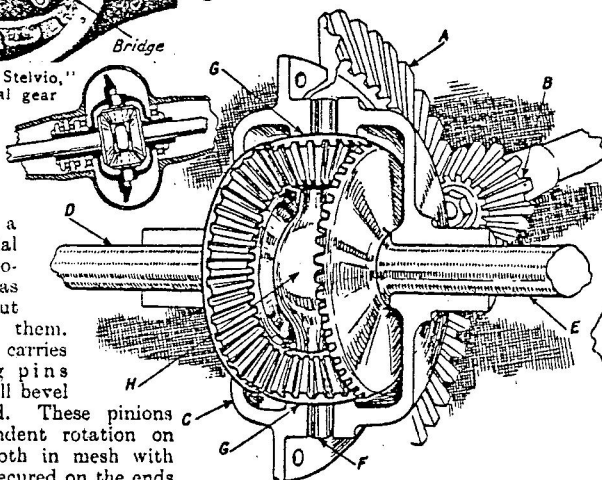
Back axle of Riley "Stelvio," showing bevel differential gear mounting in a cage which carries the crown wheel.
